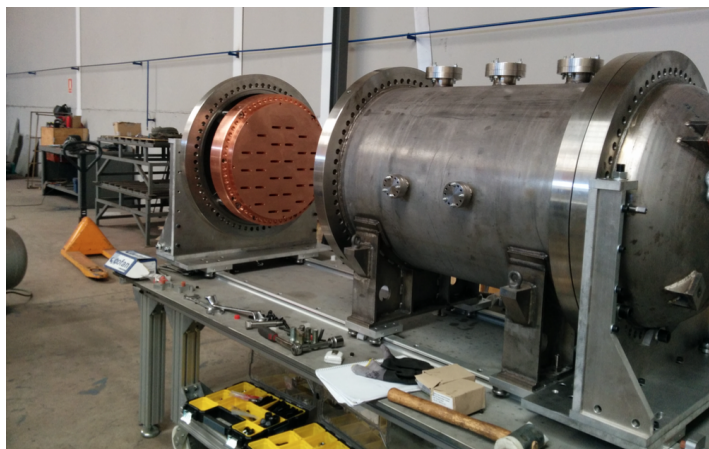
NEW vessel during its first assembly in its operational horizontal position. The tracking plane endcap is opened, showing the tracking plane copper shielding.
